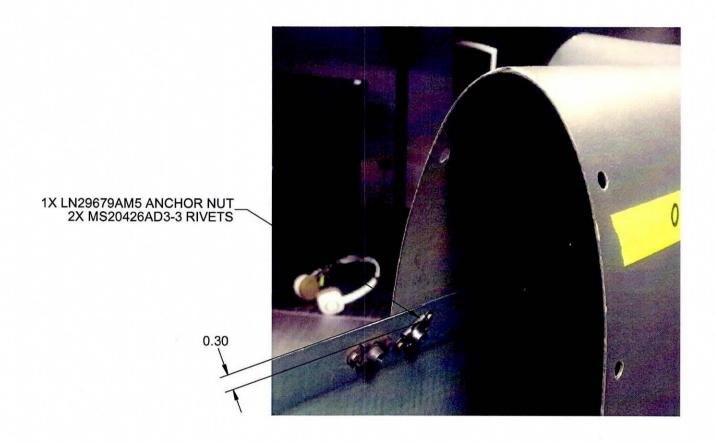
A: ANCHOR NUT INSTALLATION (FOR EC130 B4) (LH SHOWN, RH OPPOSITE)
